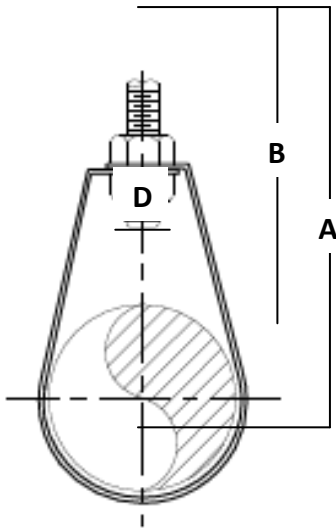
Adjustable Band Hanger "Ring Hanger Electro-Galvanized
